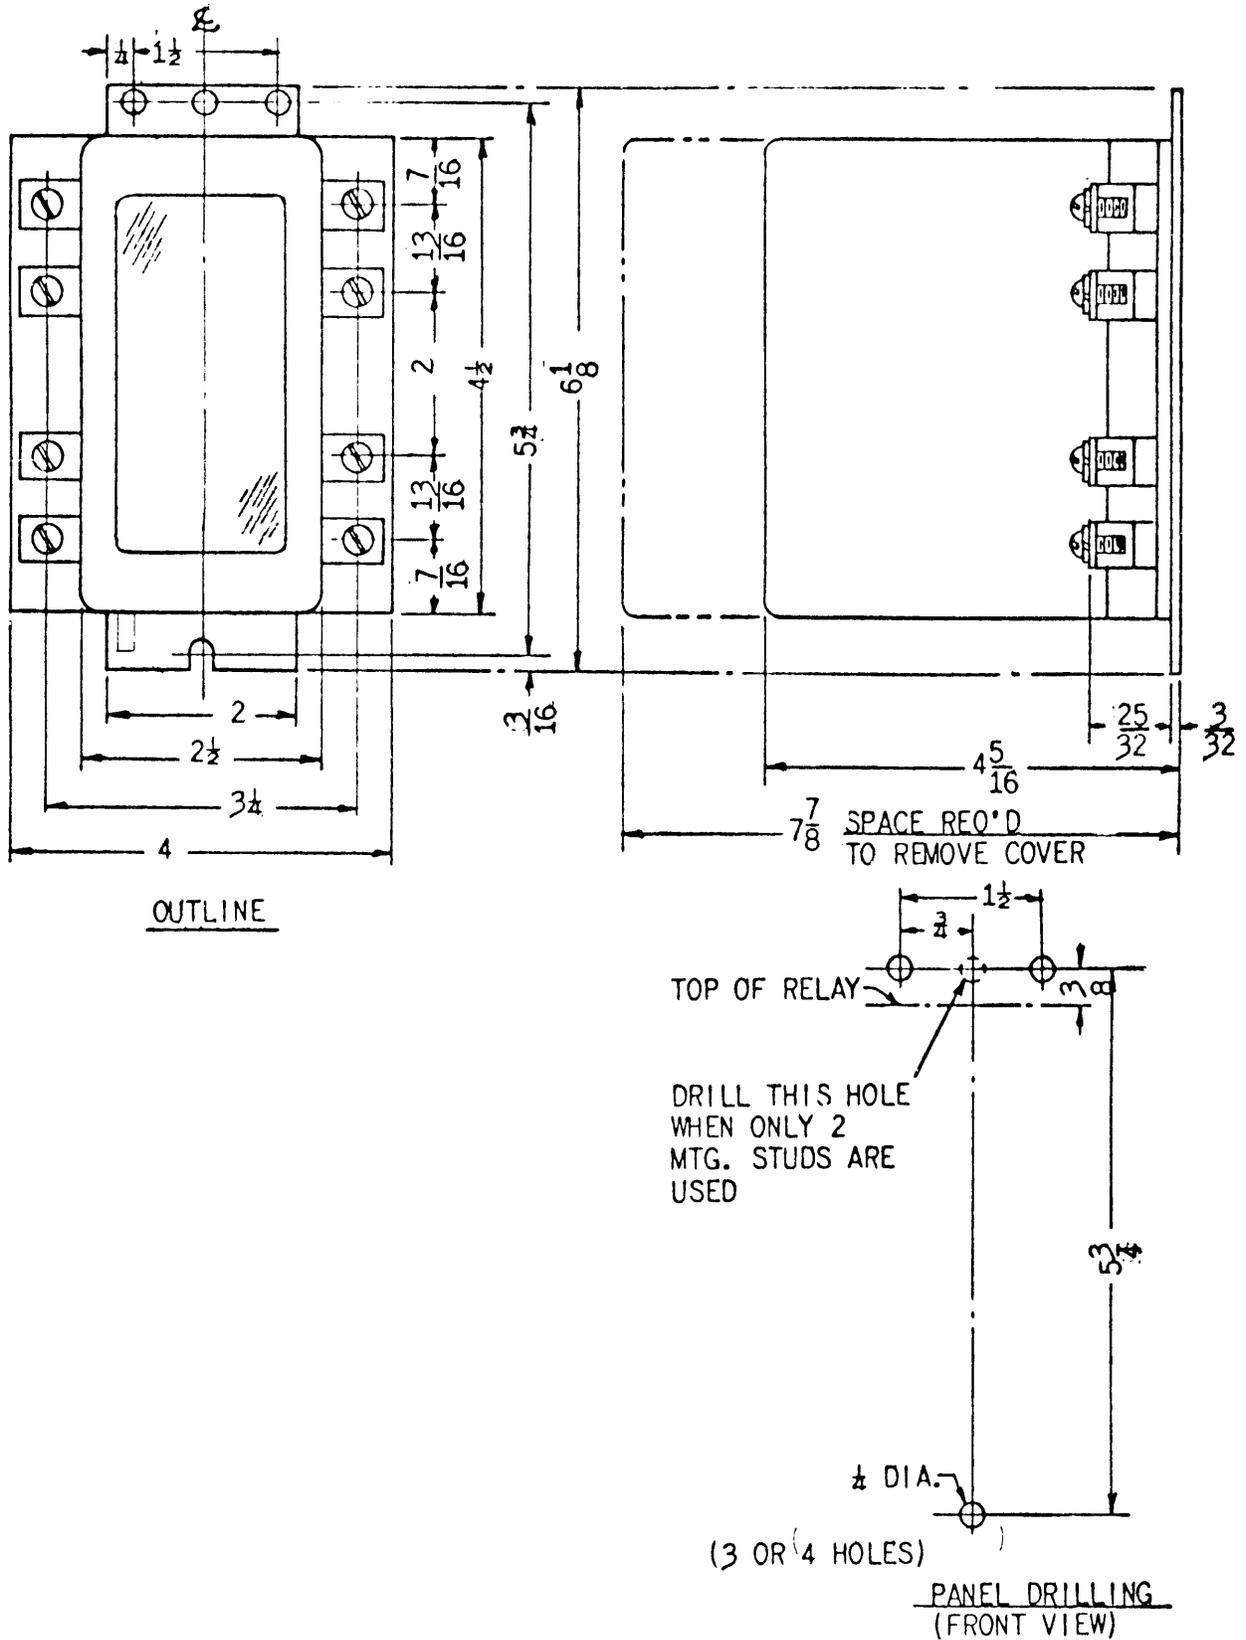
(0208A3773-0): HAA15E/15F/15G FRONT CONNECTED SURFACE MOUNTED OUTLINE AND PANEL DRILLING DIMENSIONS
